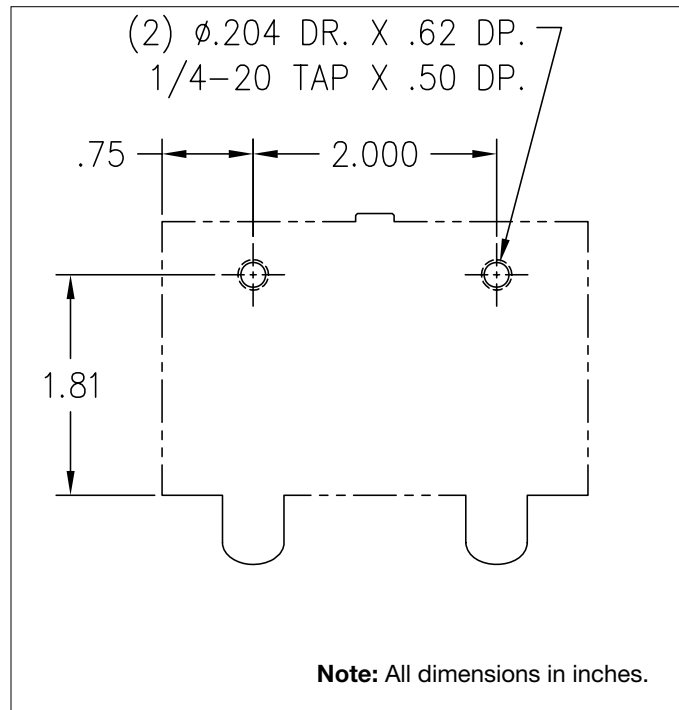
, Mounting Hole Pattern, MCSB21 Staging Block
